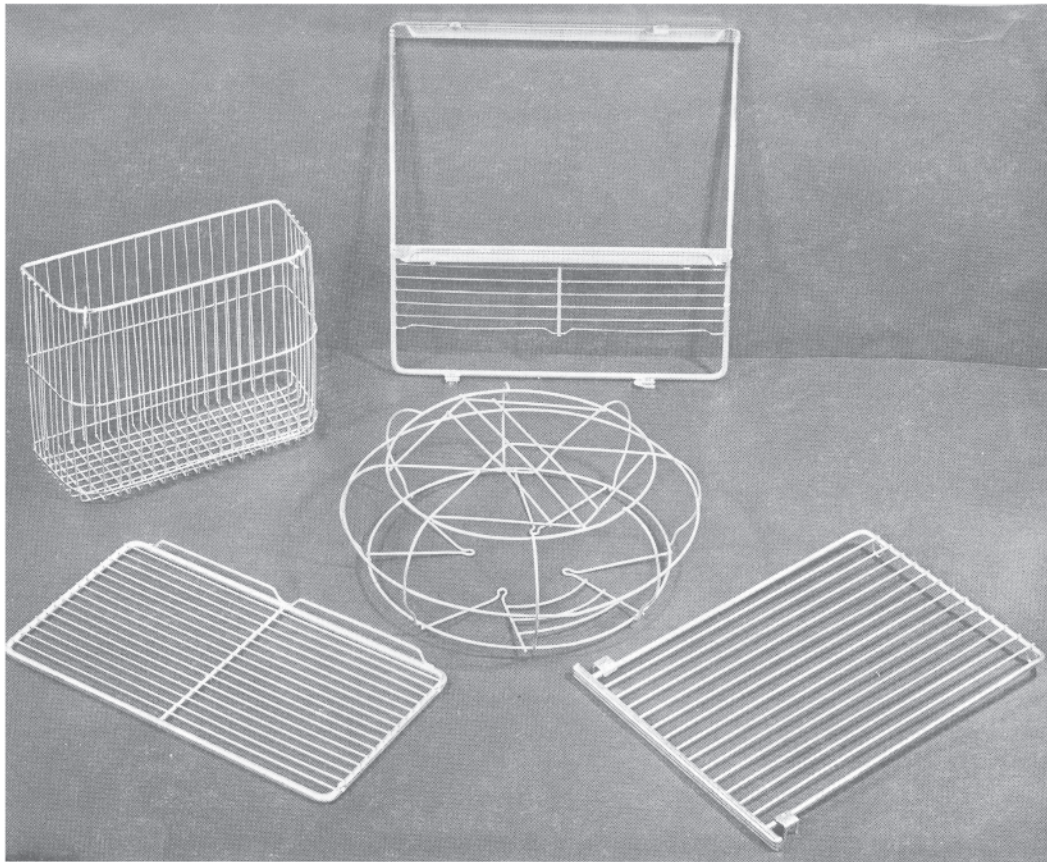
Illustration D — Zinc plated steel wire goods with anodic clear chromate coating plus baked clear enamel.
